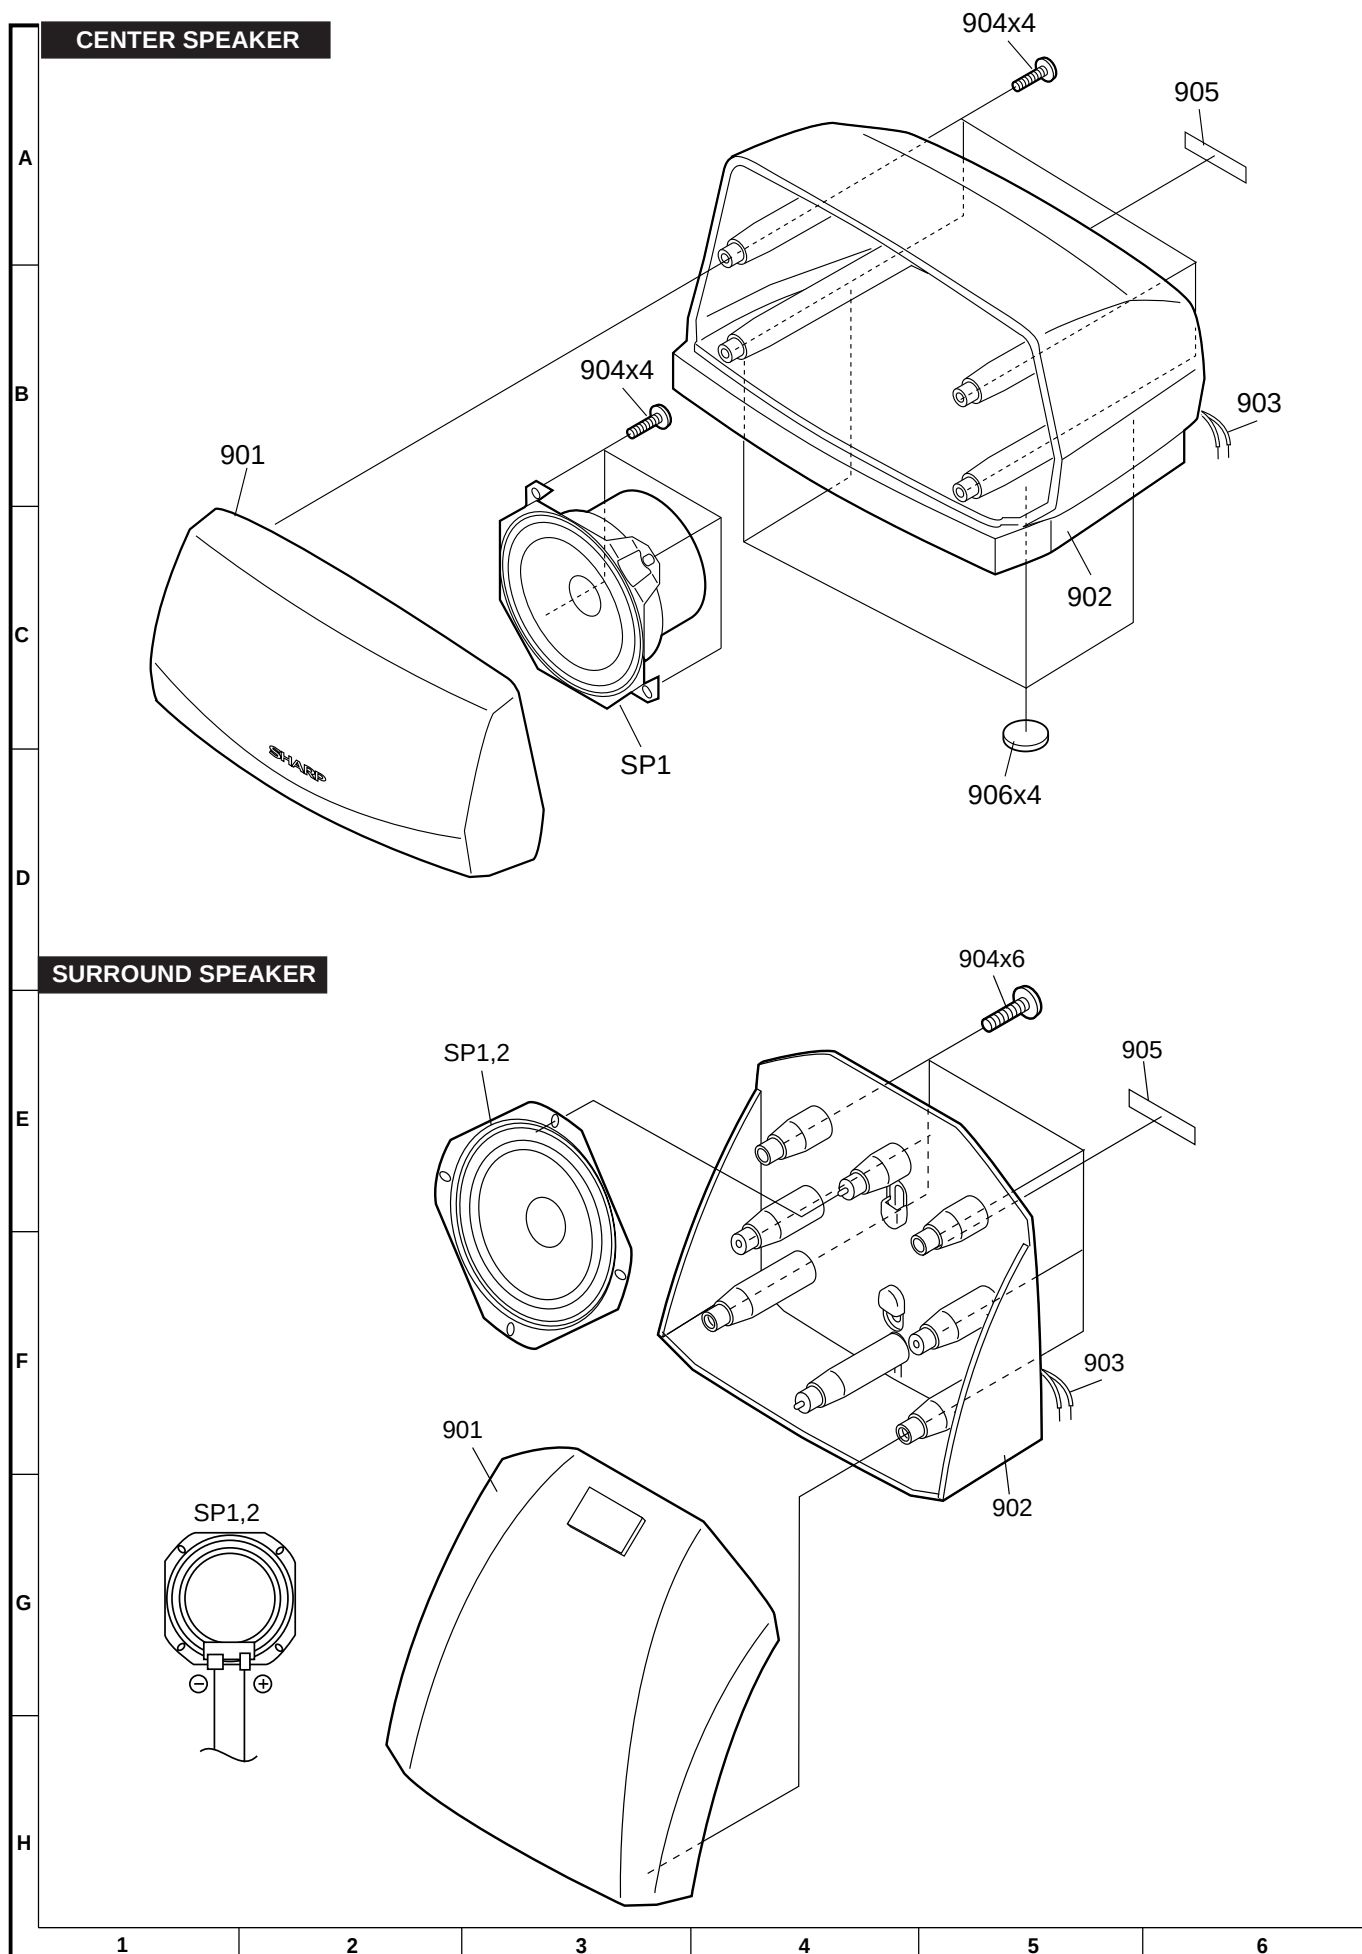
SPEAKER EXPLODED VIEW (2/2)
